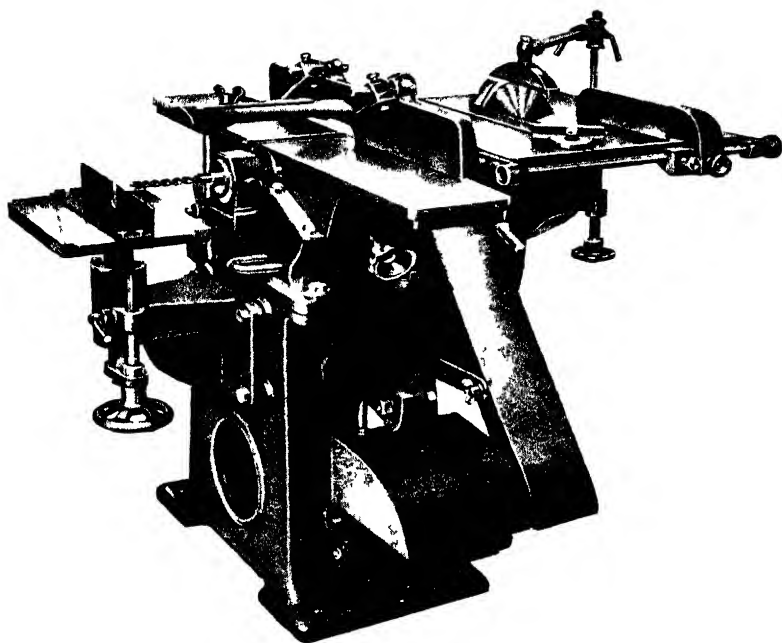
Machines of the multipurpose type are growing in popularity. The example illustrated combines a 10 in. saw bench, 6 in. planer, rebating machine, slot mortiser and a boring machine.
